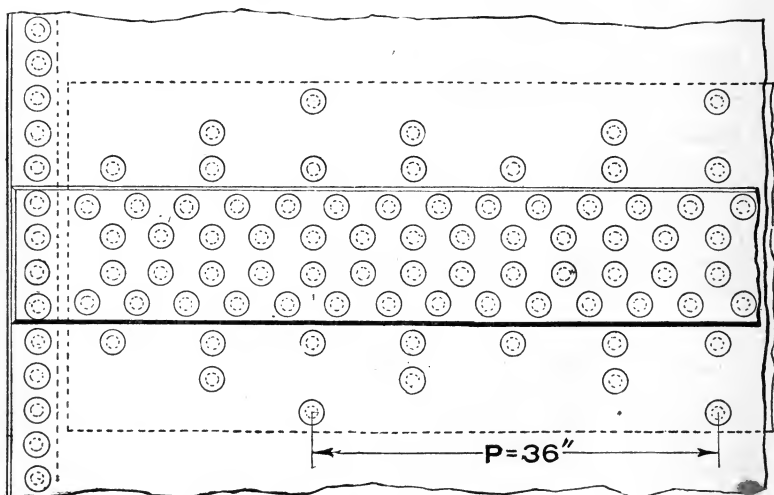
,871.—Example of butt and double strap joint, quintuple riveted.
